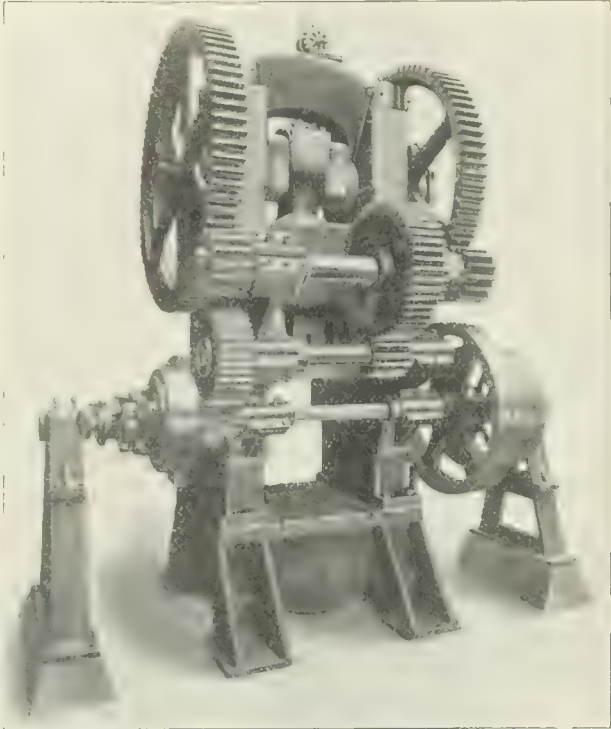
Rear View, Showing the Arrangement of the Gears.
